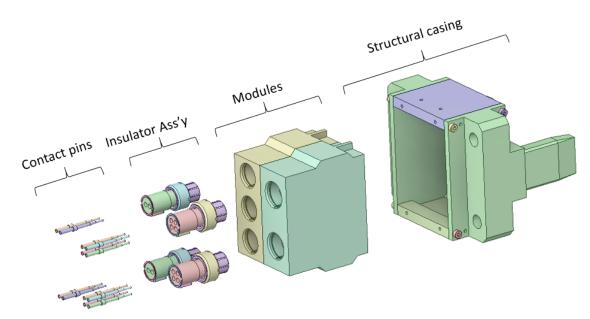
Sub-assemblies which FE male connector assembly is composed of
